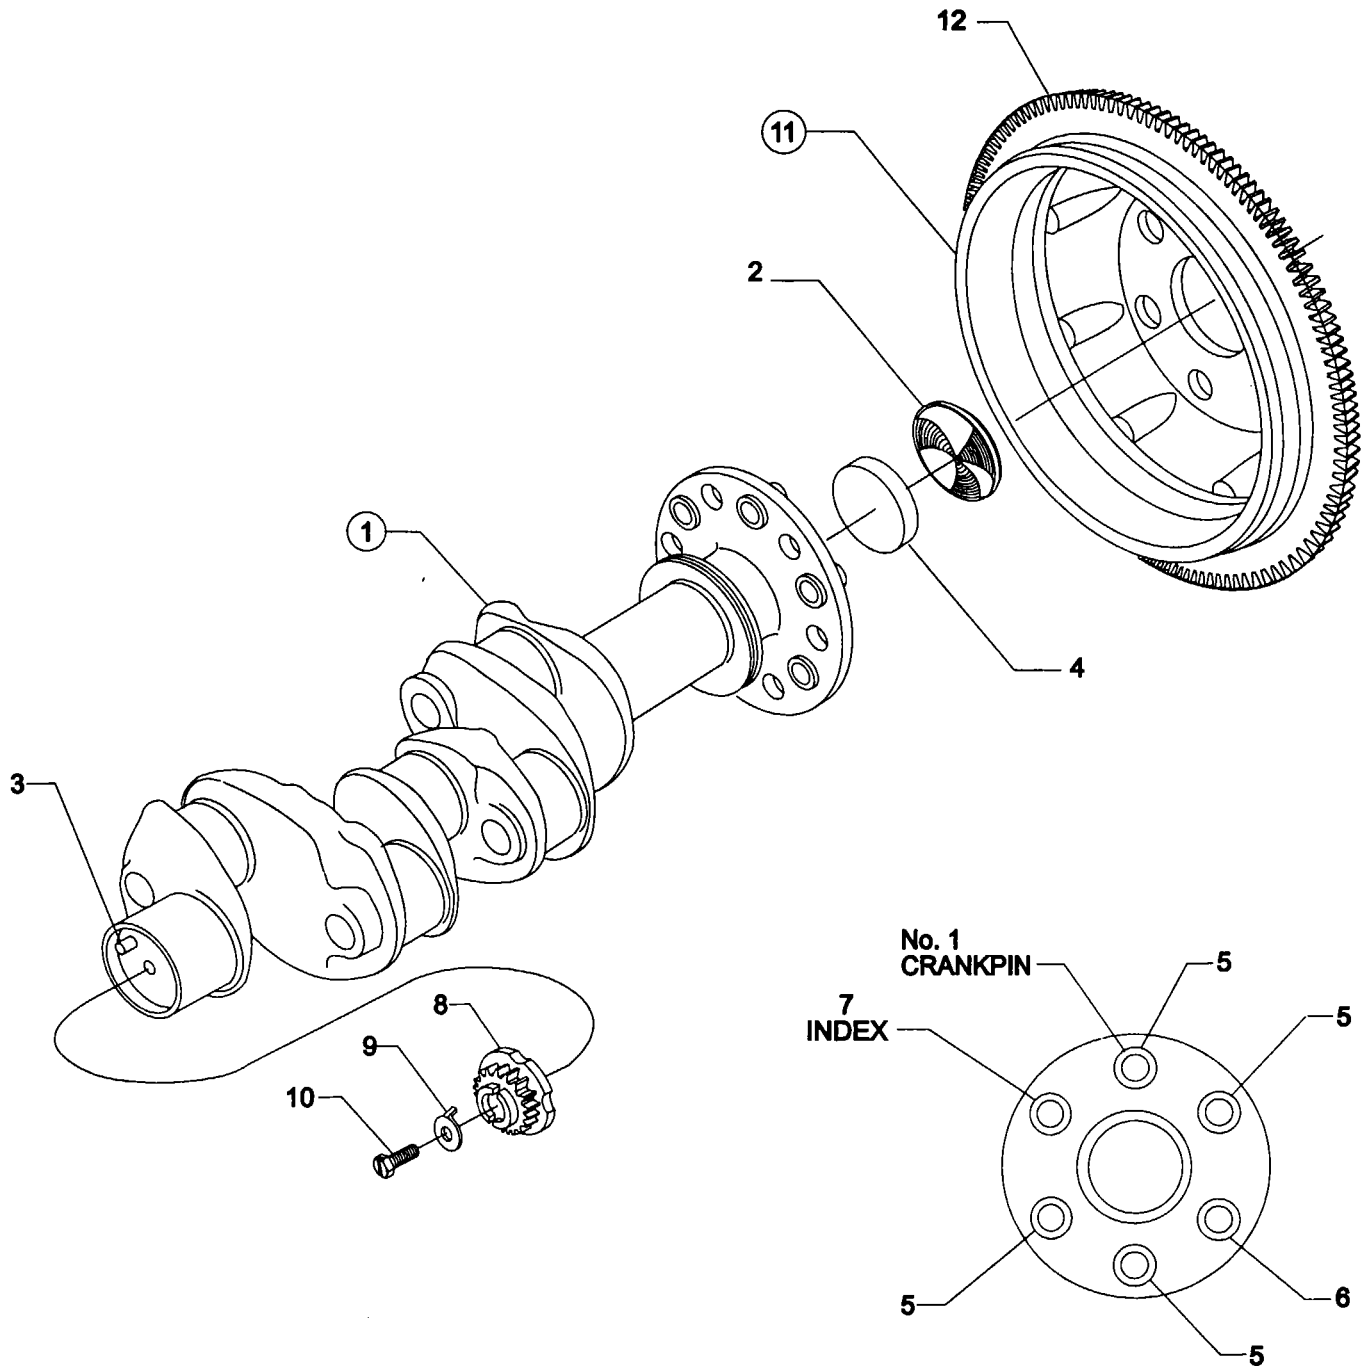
CRANKSHAFT ASSEMBLY AND RELATED PARTS
